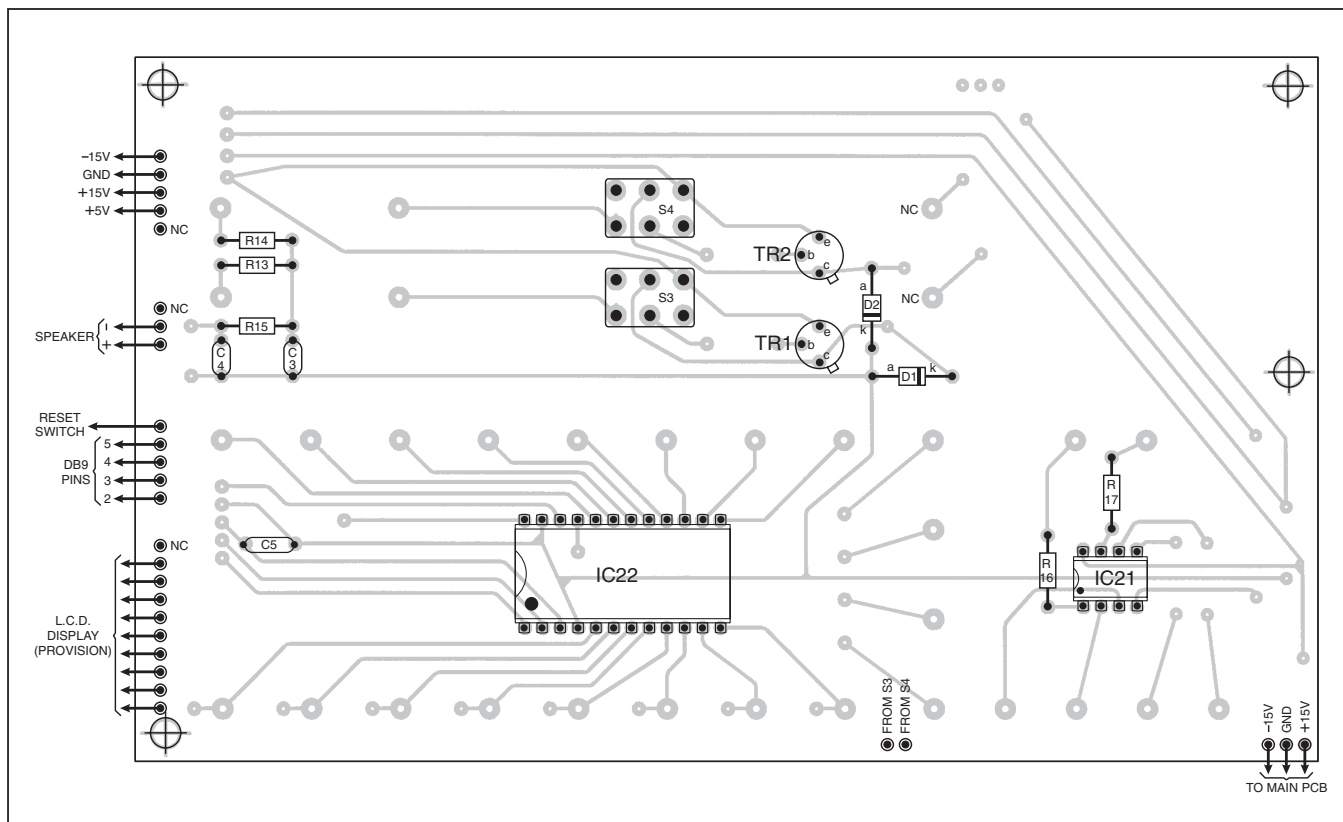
Component layout details for the ATOM microcontroller p.c.b.
